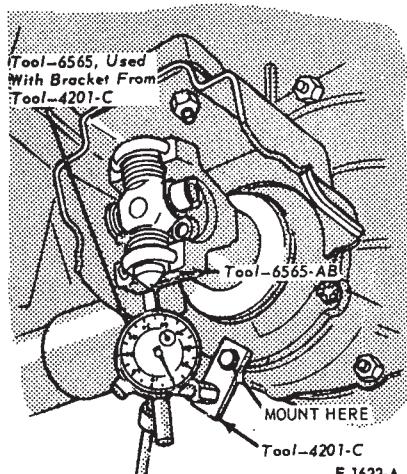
Flange Bearing Cup Run-out Check—Typical
